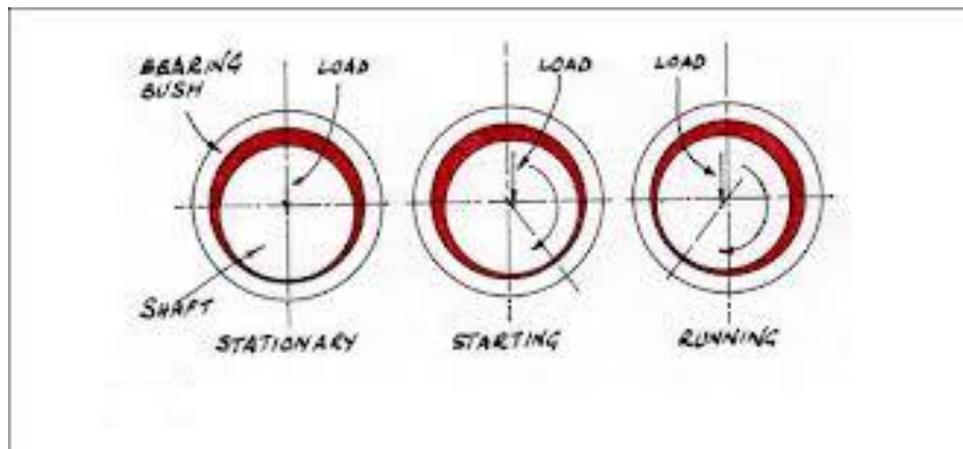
The dynamic analysis of rotor bearing system supported on fluid film journal bearing.
